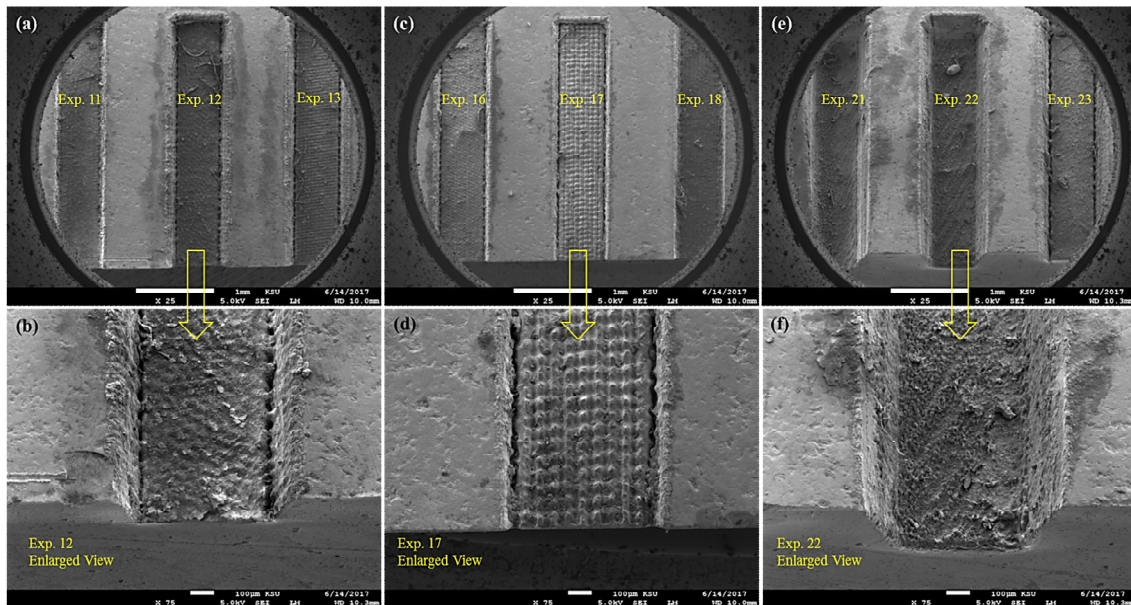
Scanning electron microscopic analysis of micro-channels machined under different machining conditions against experimental runs performed during 2nd set of experiments: (a) Exp. 11-13; (b) enlarged view of exp.12; (c) exp. 16-18; (d) enlarged view of exp. 17; (e) exp. 21-23; (f) enlarged view of exp. 22.
